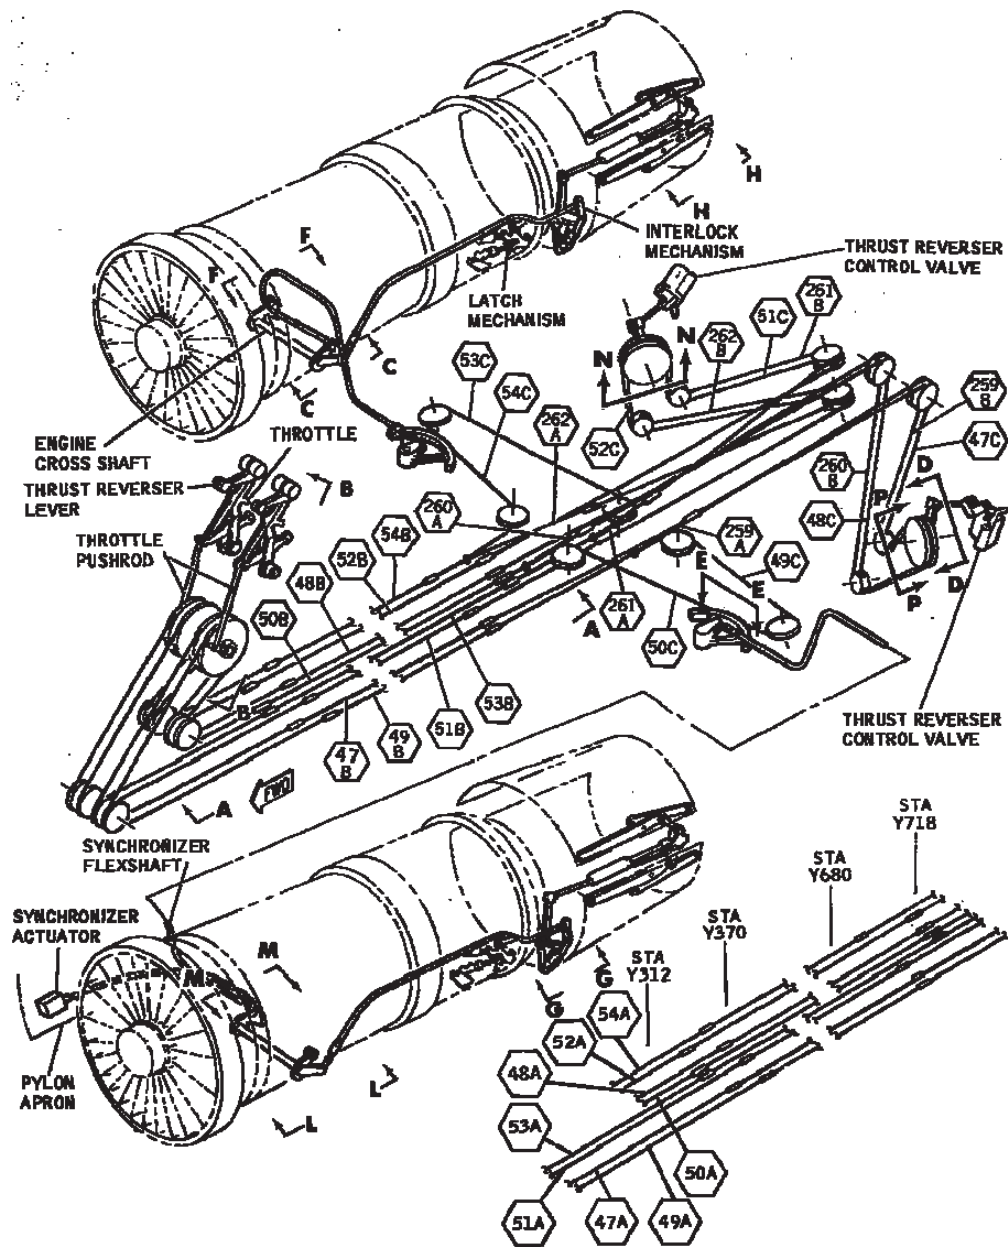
MD-80 Thrust Reverser Control (Reprinted Courtesy of Boeing)
